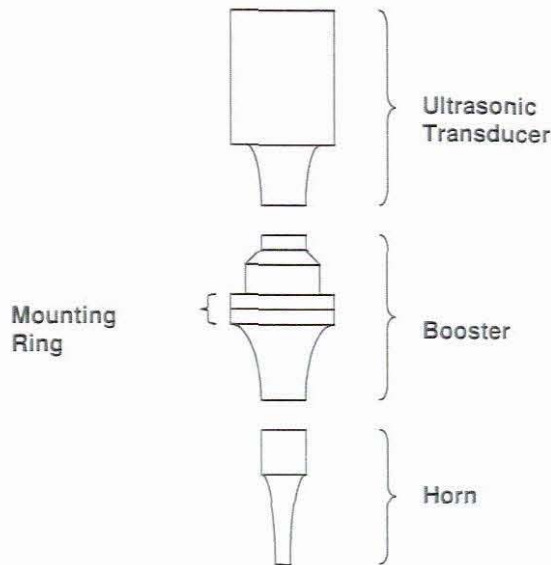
Ultrasonic plastic welding work-piece broken into three comprising components
